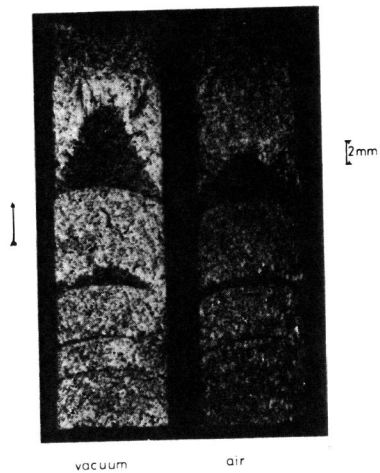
Macroscopic appearance of the fracture surfaces.
